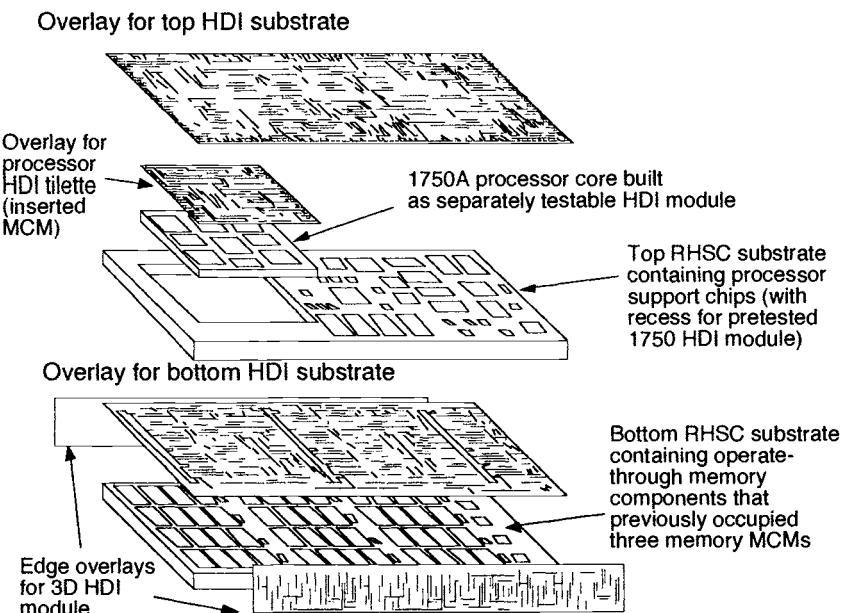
Exploded view of an RHSC module, illustrating the use of HDI subtiles and 3D assembly.
